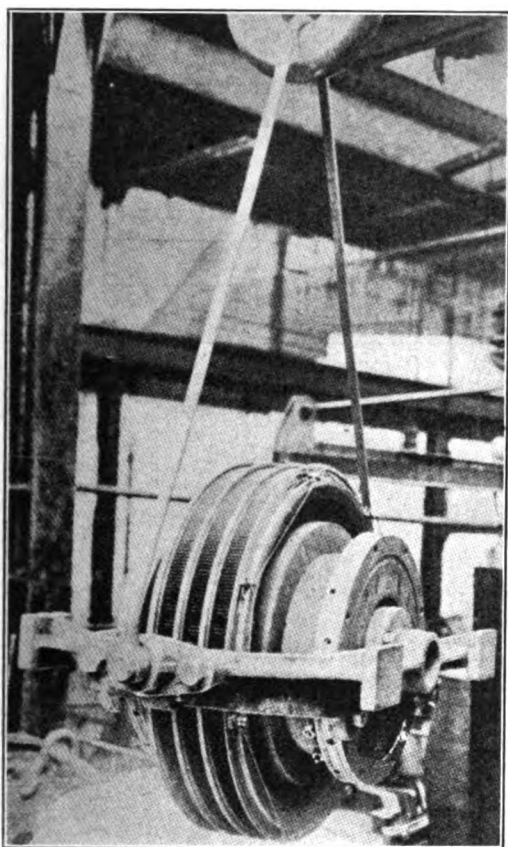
COMPLETE TURBINE LIFTED CLEAR OF CASING
